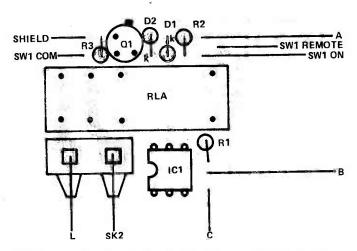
Component overlay. The terminal block is secured by tightening the lower pair of screws onto wires soldered to the PCB.
